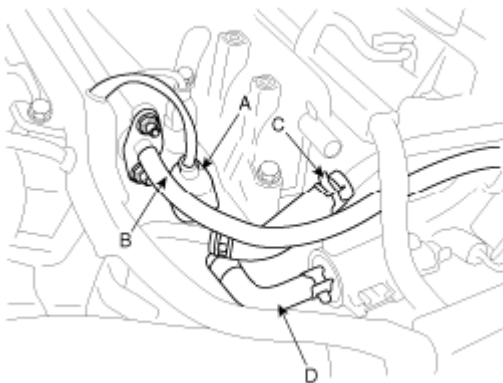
Identifying Brake Booster Vacuum Hose, PCSV Hose, Fuel Hose And CMP Sensor Connector
